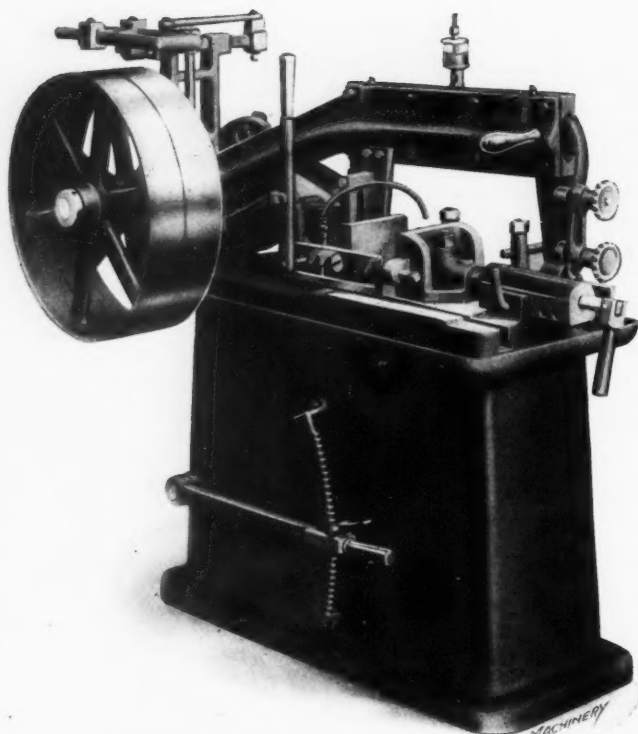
Opposite Side of Hacksaw shown in Fig. 1
